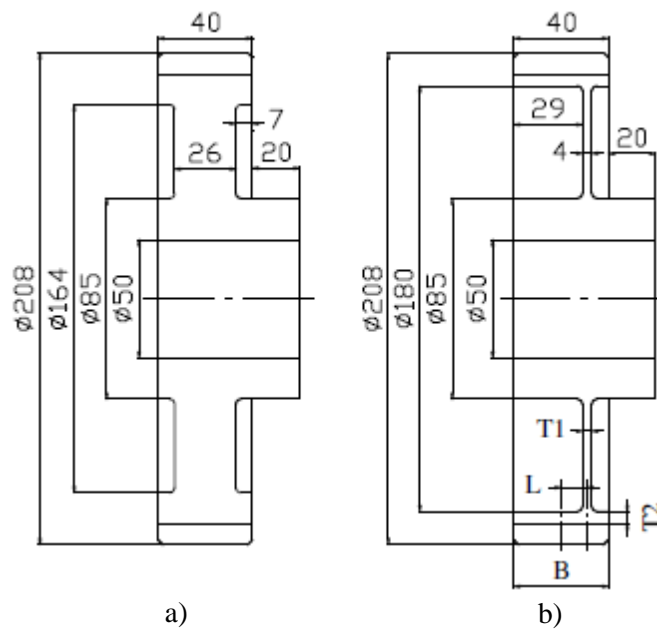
Design parameters of a) Gear A and b) Gear B (Li 2008).
